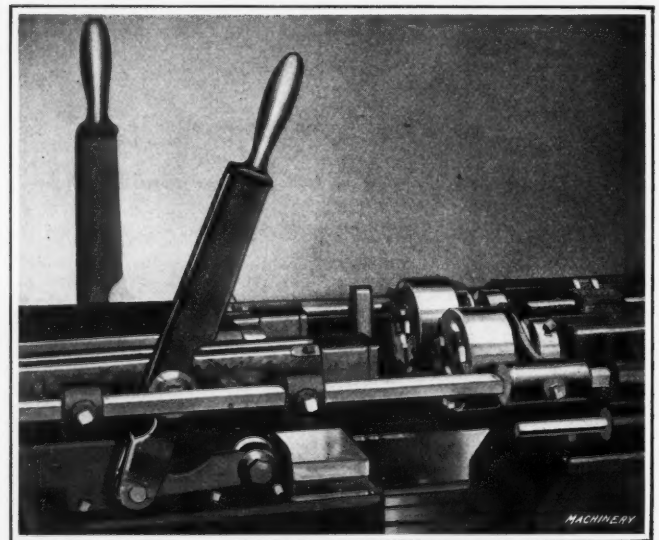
Threading Dies and Feed Mechanism on Machine shown in Fig. 5
